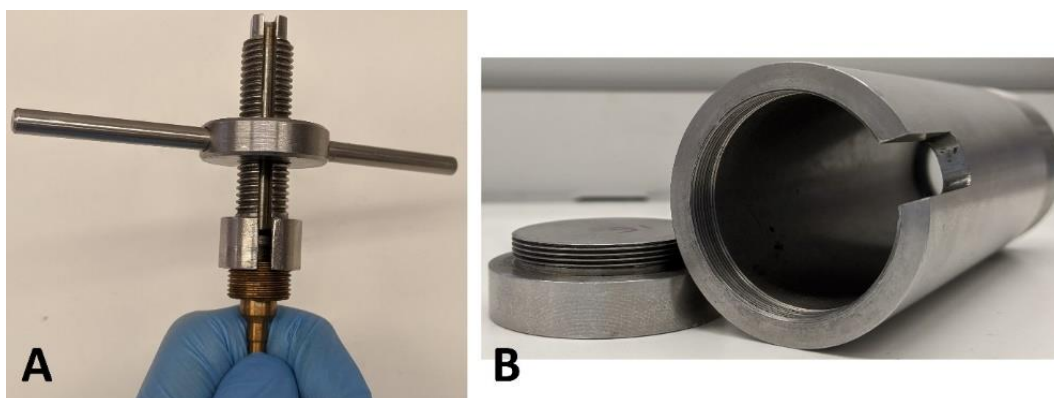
Additional tools. With: A – extraction tools and B – protective cylinder. Both additional tools were made of stainless steel (SST). Please note that A has the feedthrough plug which is engaged into the tool for demonstration purposes. Dimensions of parts can be found in Appendix A.
